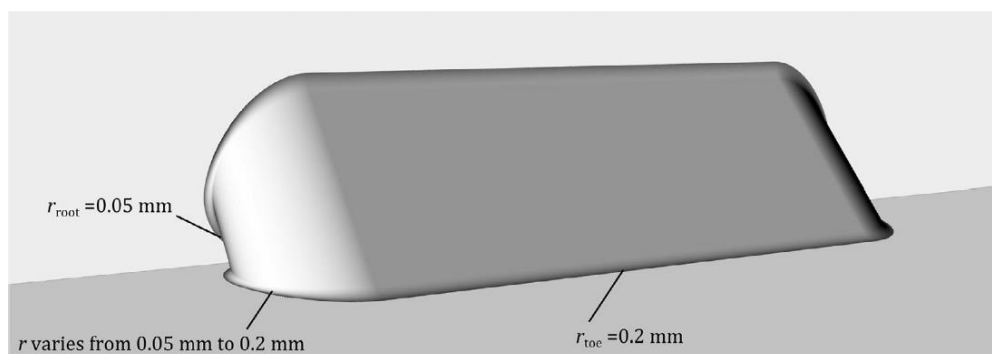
idealised weld end model with different radii at weld root and toe, [1].
